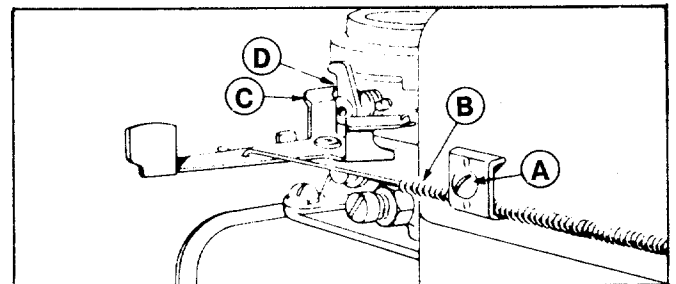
THROTTLE CONTROL ADJUSTMENT
